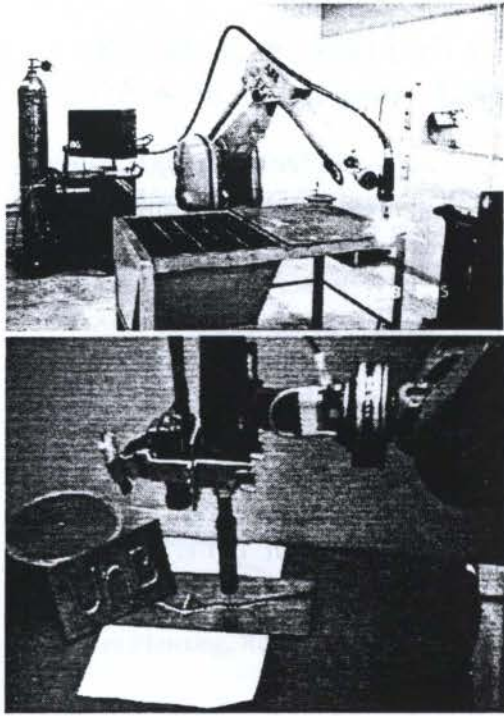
Weld robot at GRACO/UnB – Brasilia. detail view of the TCP mounted CCD-camera and Laser diode.
